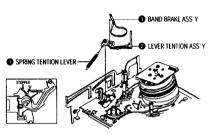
Lever Tension Ass'y, Band Brake Ass'y Removal
